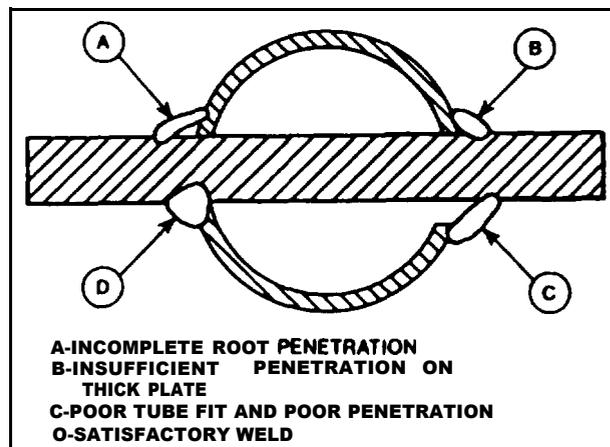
Common defects to avoid when fitting and welding aircraft certification cluster.
